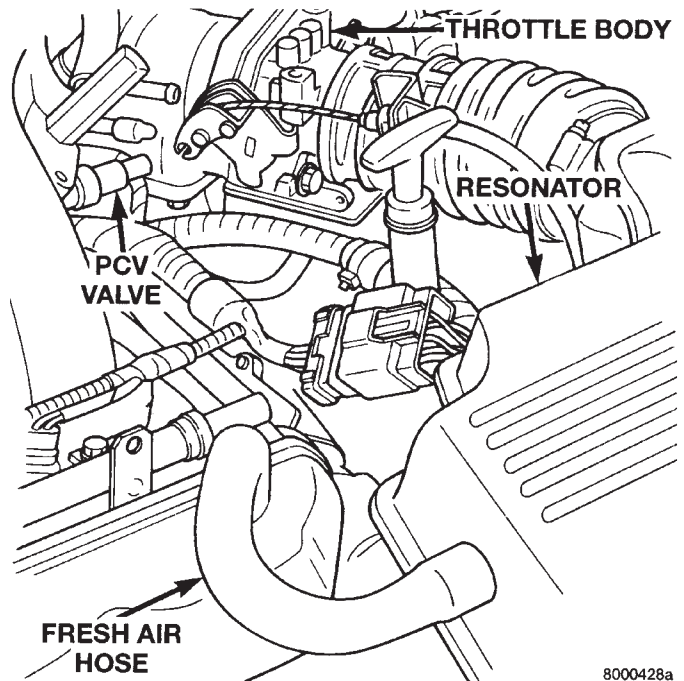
PCV Valve and Fresh Air Hose— 3.3/3.8L Engines
